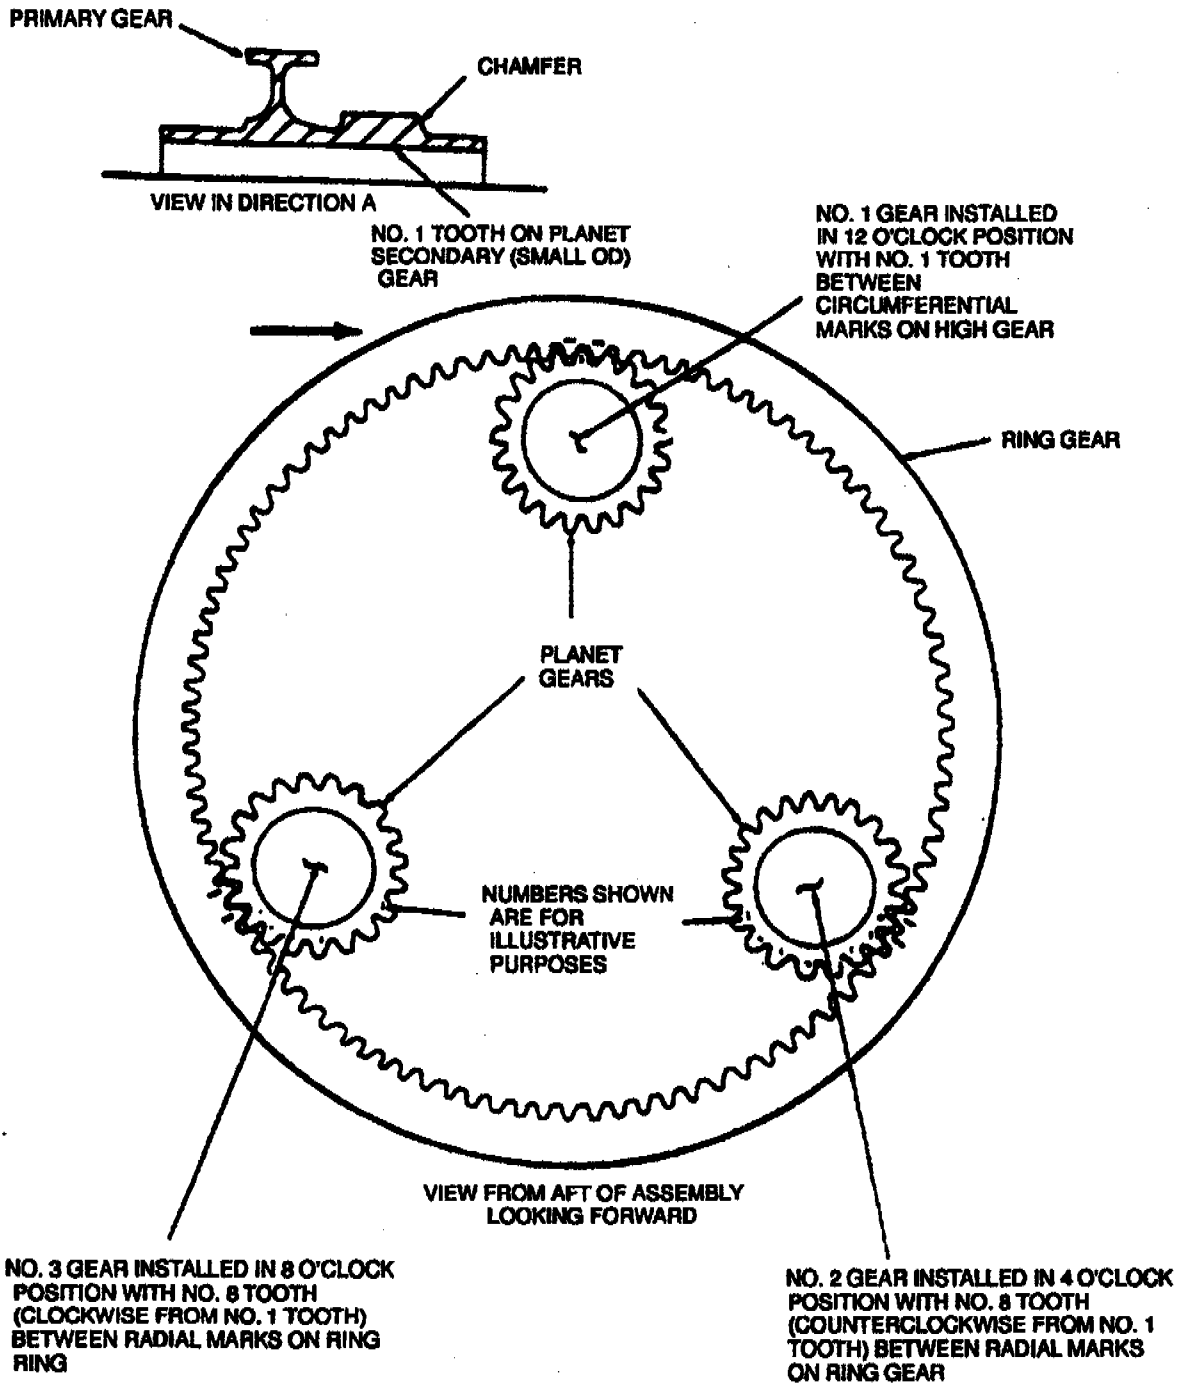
Planetary Gears - Assembly Locations (T53-L-15).
